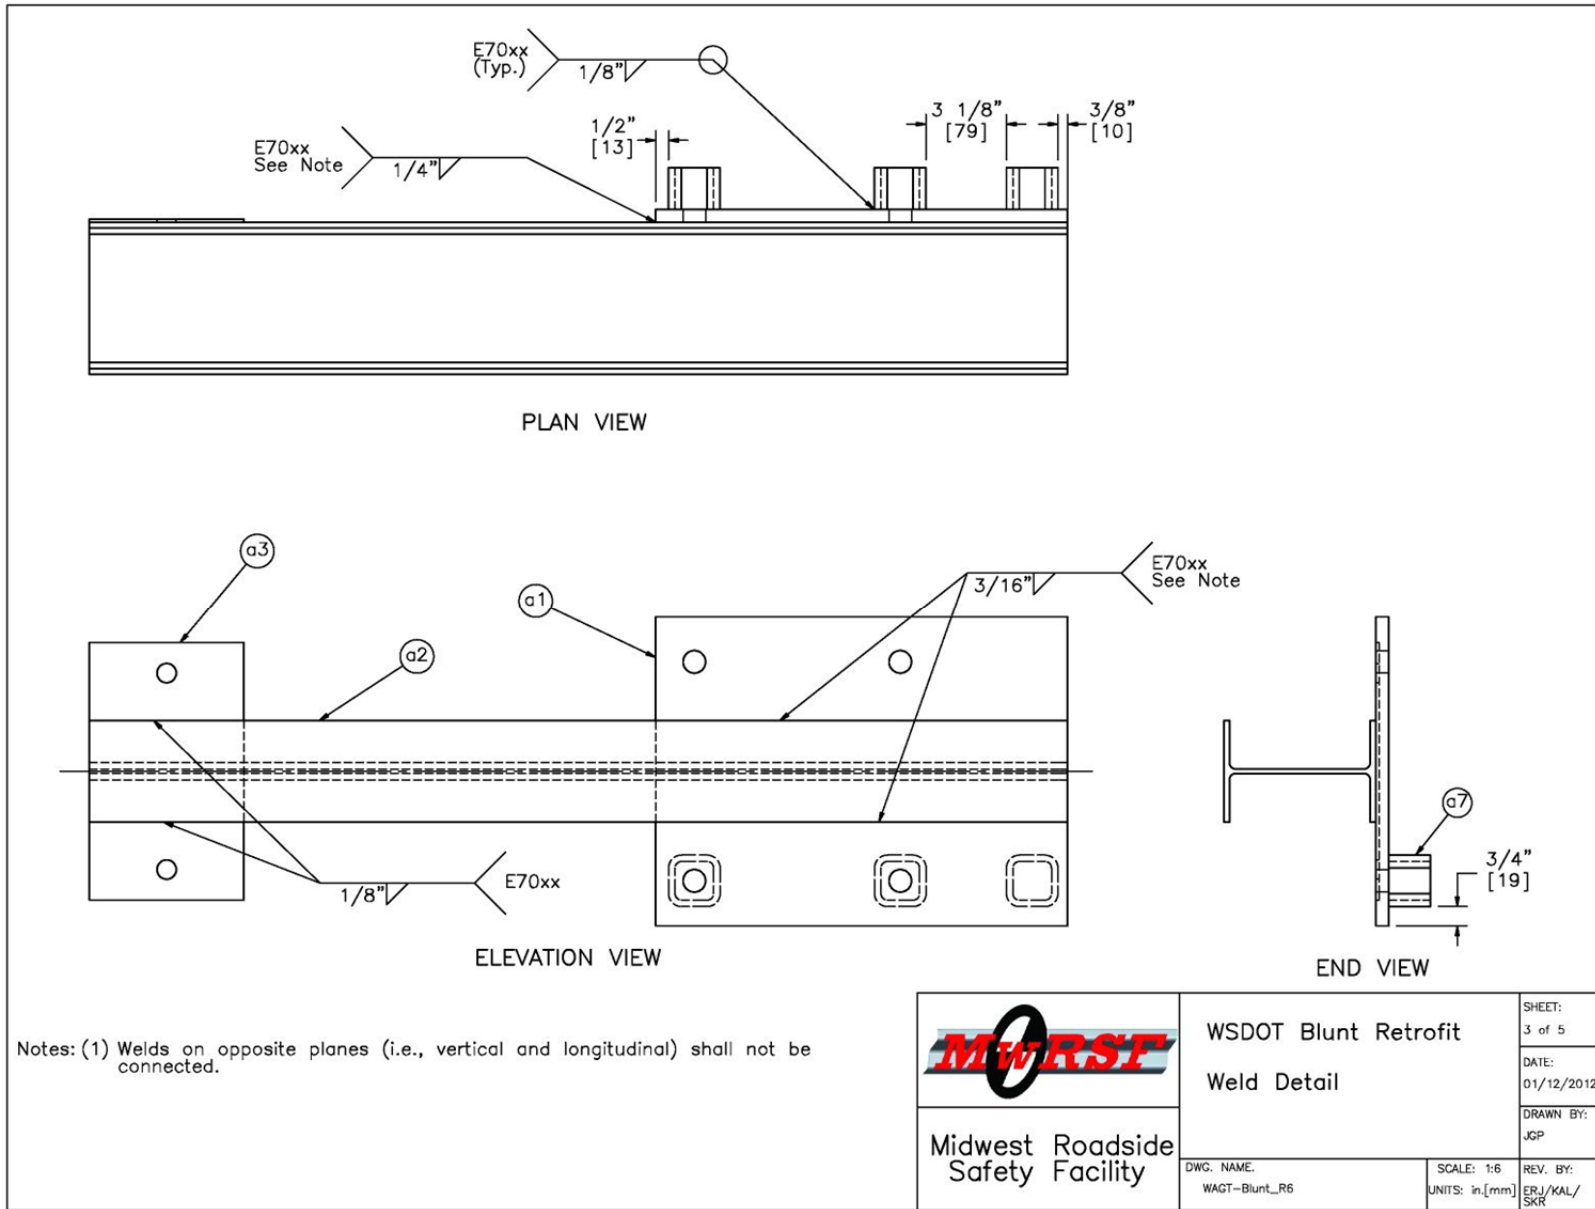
Retrofit 2 – Blunt-End Weld Detail
